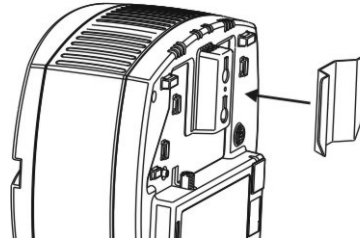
Fasten mounting bracket insert to SC141/142 CU
